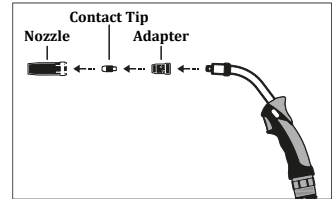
Removing the Nozzle, the Contact Tip and the Adapter
